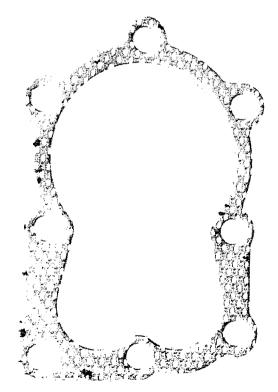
A head gasket forms a seal between the cylinder head and block.
